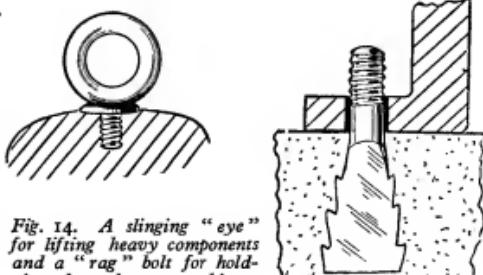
A slinging "eye" for lifting heavy components and a "rag" bolt for holding down heavy machines
